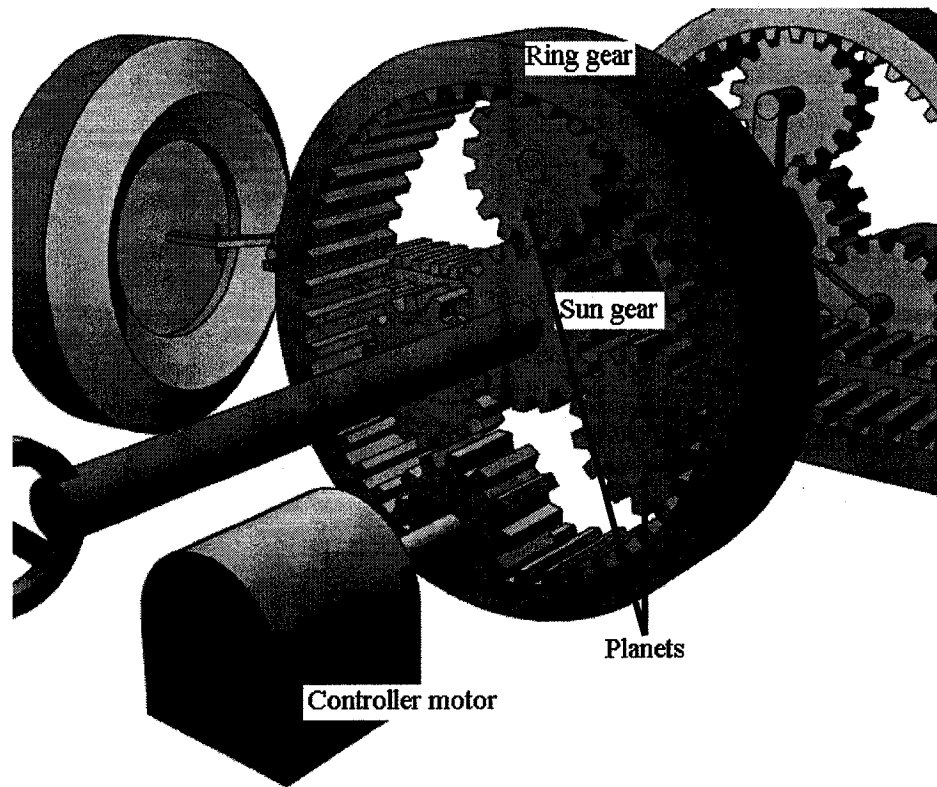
AIFS mechanism, planetary gear and controller motor
